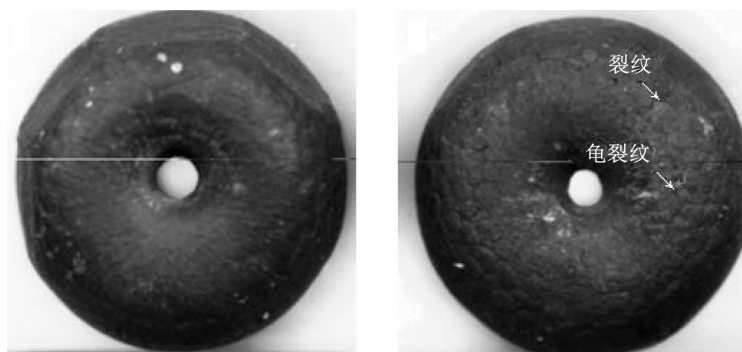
There are burrs and cracks on the contact surface of circuit breaker
